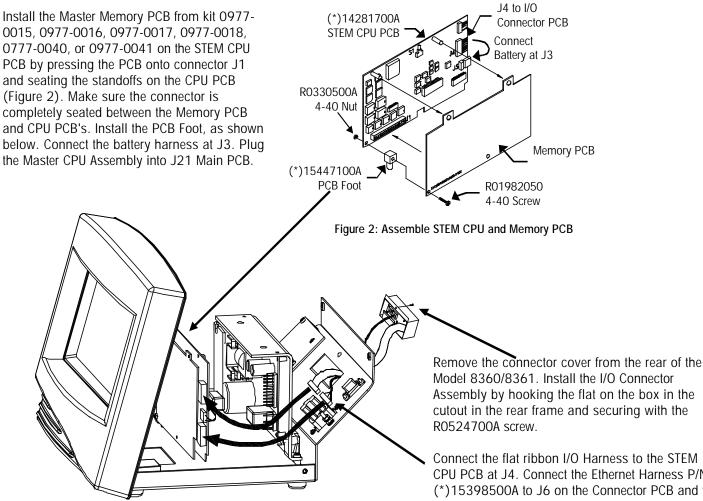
Installing STEM/Memory PCB's and Connector Box Assembly
